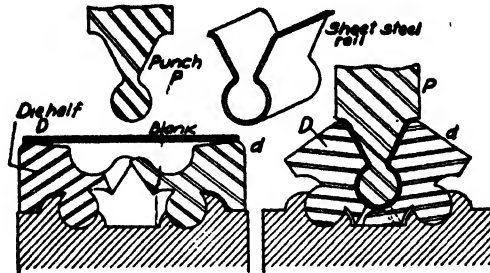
Single-operation Press Brake Die for Forming Sheet Steel Rail.
